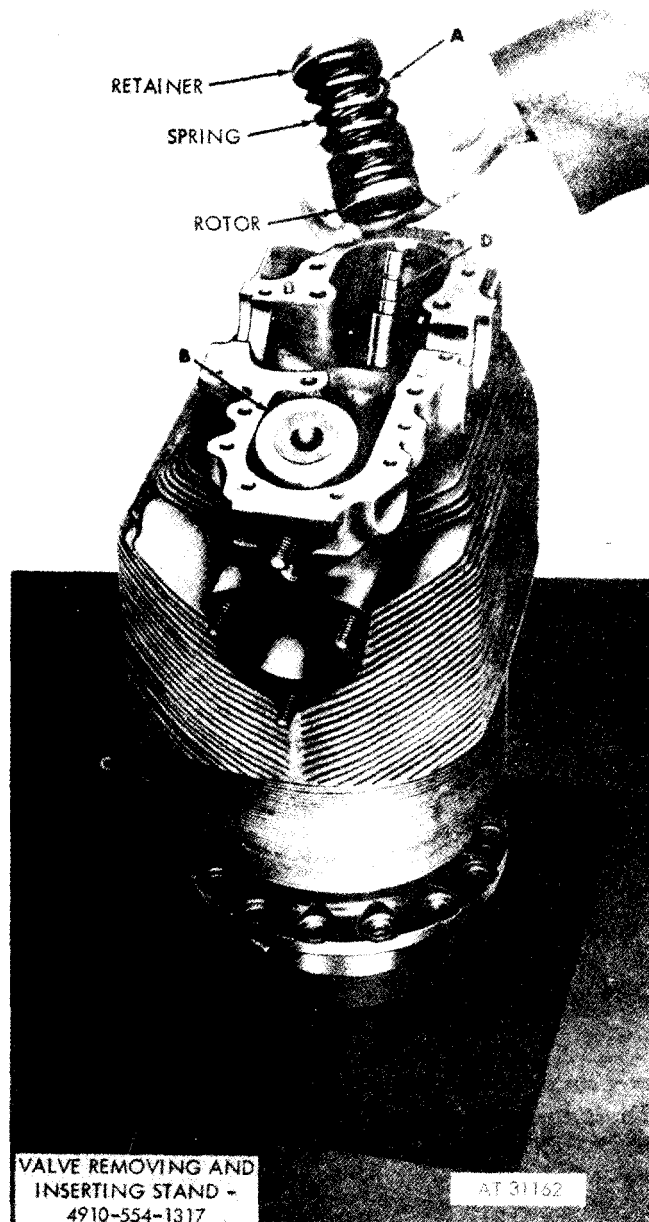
Cylinder showing position of valve lifter assembly - 5120-678-5285 and removing and inserting valve stand - 4910-554-1317.
